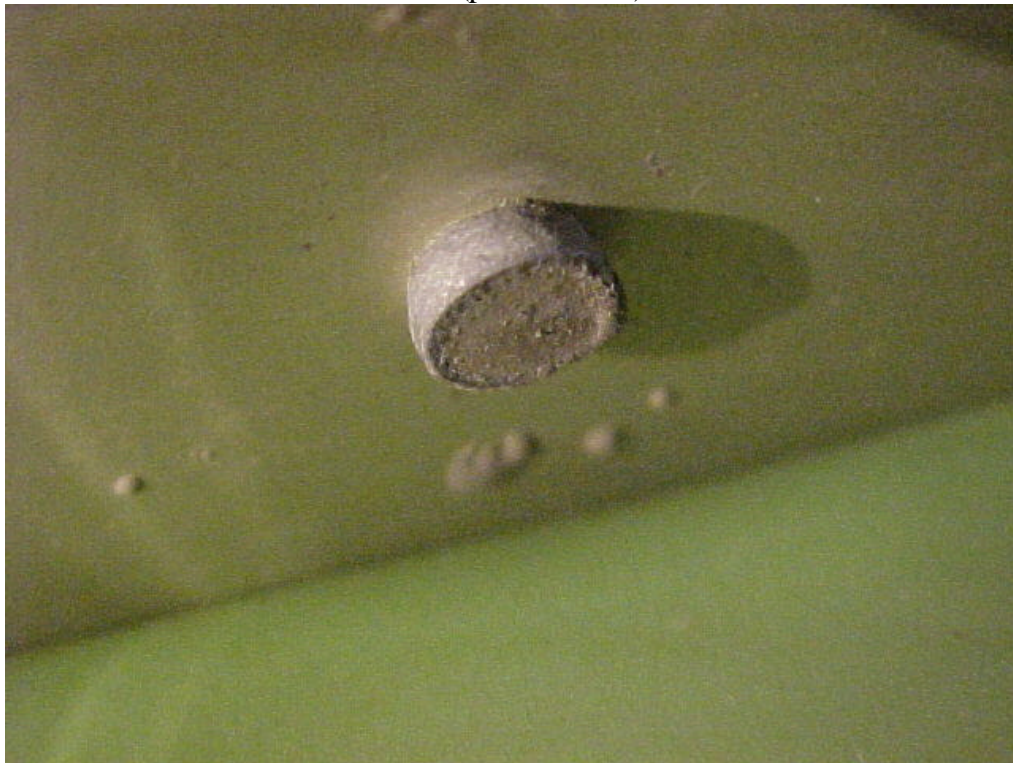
Photograph showing internal detailed visual inspection indication at BS 620, stringer 4R, rivet 6 (panel FT2/F4).
